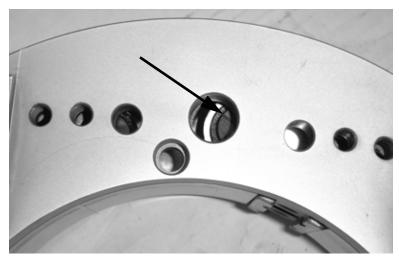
Check for bearing rotation as you turn the rotating ring.
